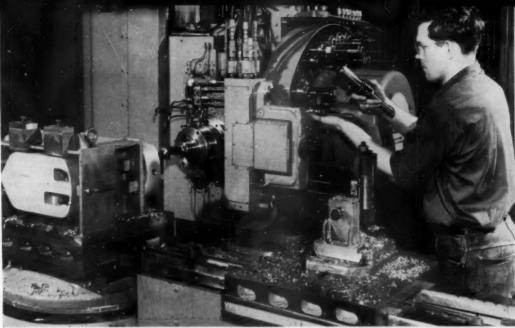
This milling machine is designed for a variety of metal-removal tasks. An automatic tool changer stores coded and preset tools to be used as the job requires.
